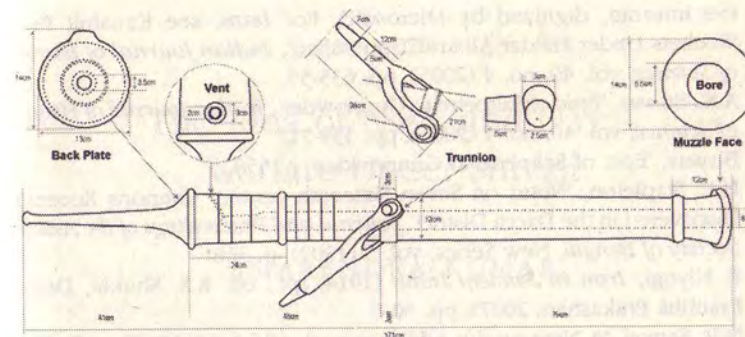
THE FORGE WELDED NAVAL IRON CANNON #4.
